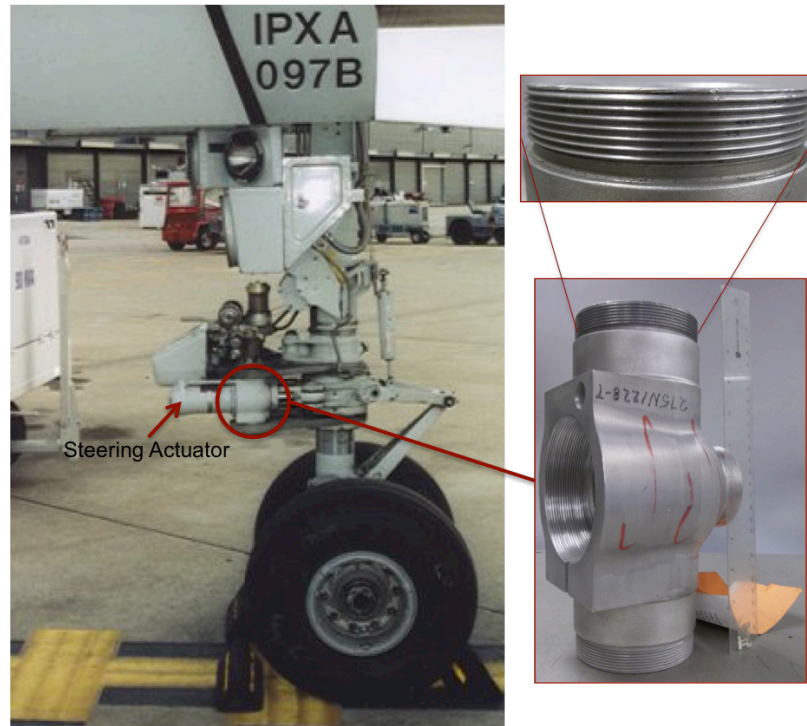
The steering actuator assembly in the Boeing 757 nose landing gear system [4]. The component and threads that need to be repaired are circled and shown separately.
